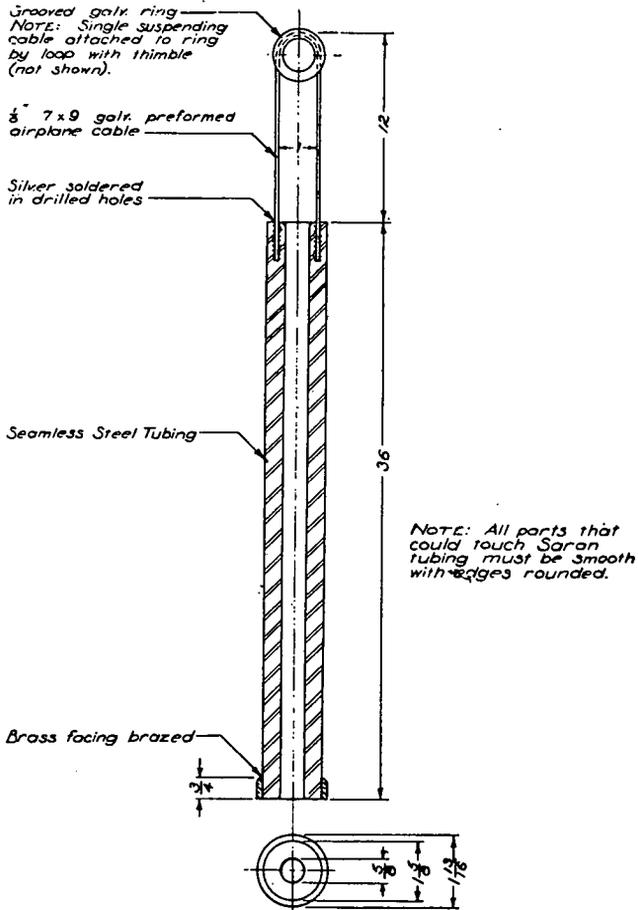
TAMPING HAMMER (Dimensions in inches).
